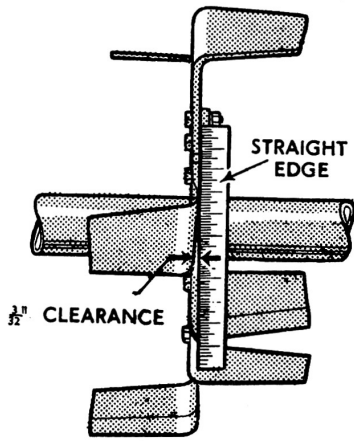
Checking blade alignment with straight edge (or setting bar.)
